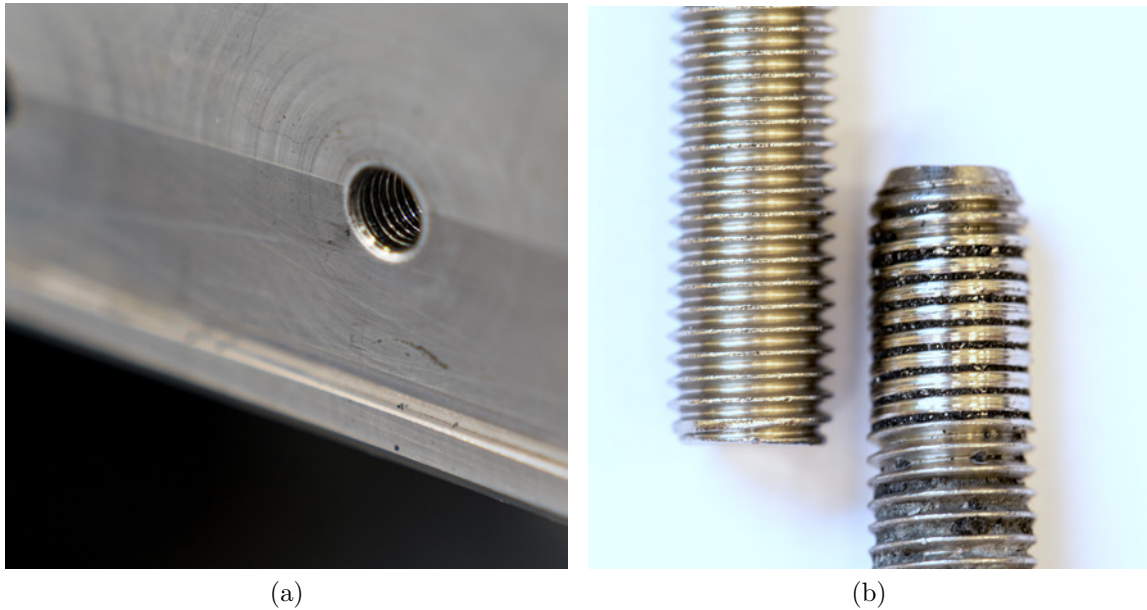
(a) Threaded hole of the test section frame (b) Comparison of new screw (left) and badly stripped screw (right) that should be discarded
